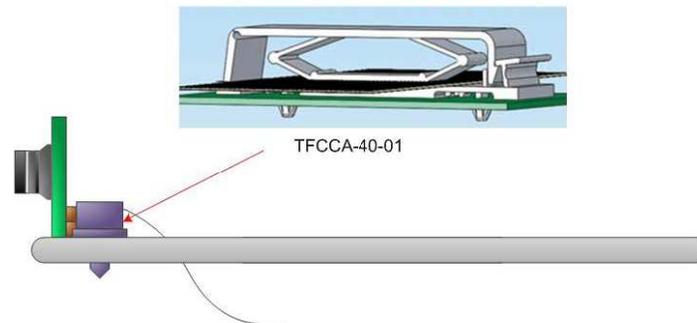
OmniVision Image Head Board Assembly on Silver Box
